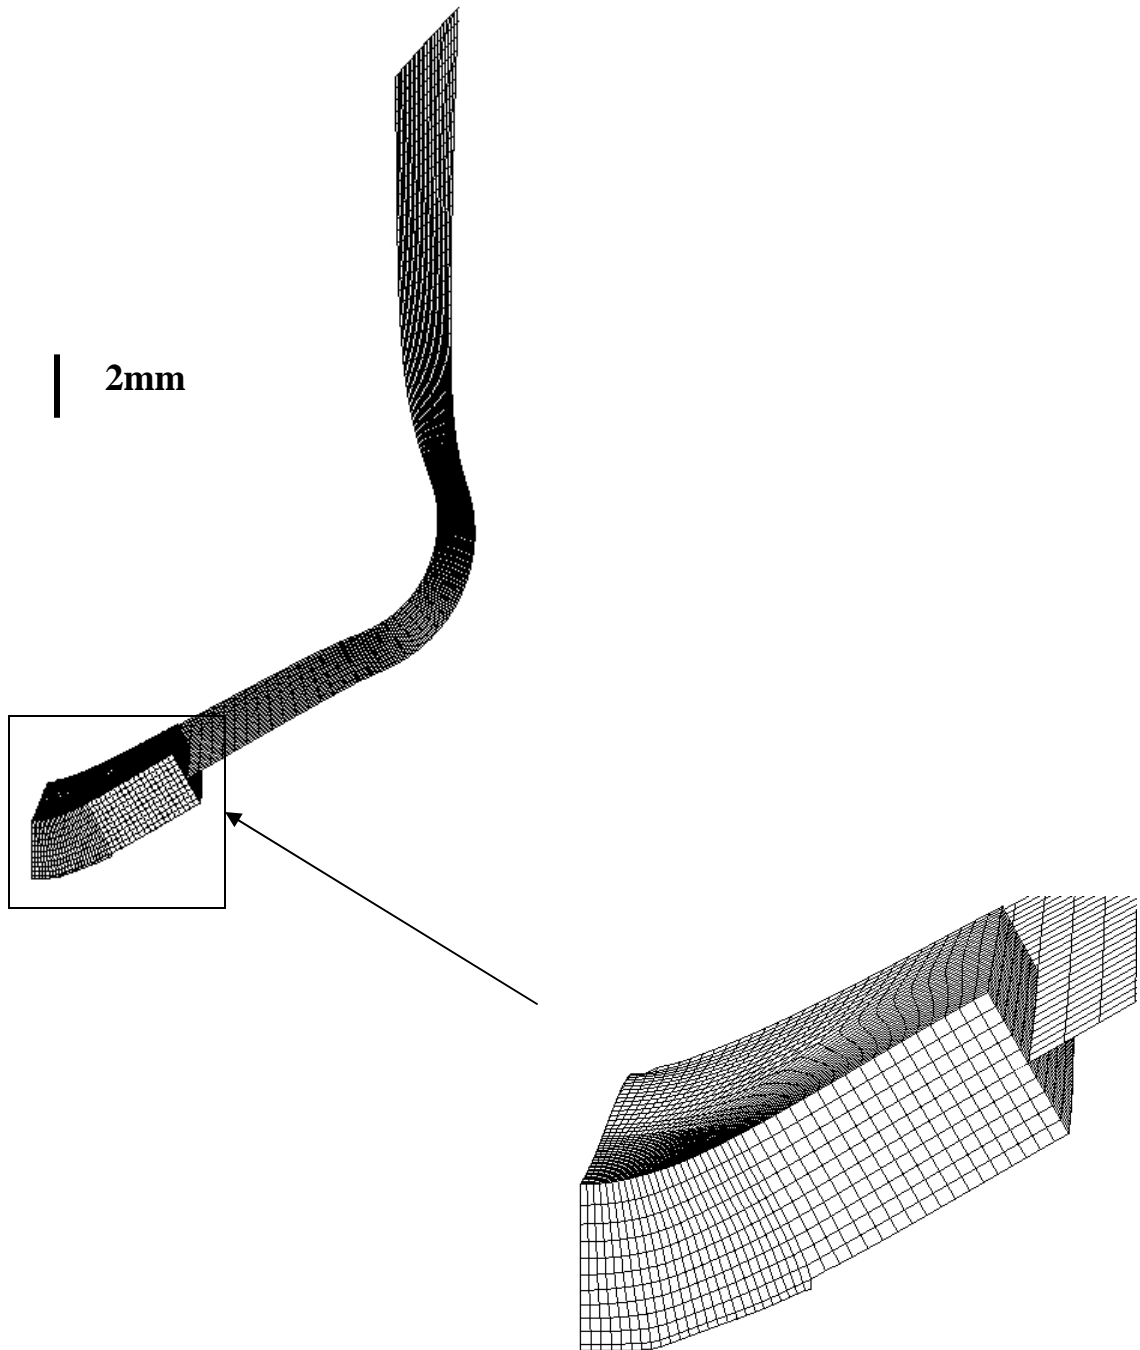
Deformed shape prior to final unstable fracture for mode-I coach-peel. The spot-weld nugget fracture is mode-I.
